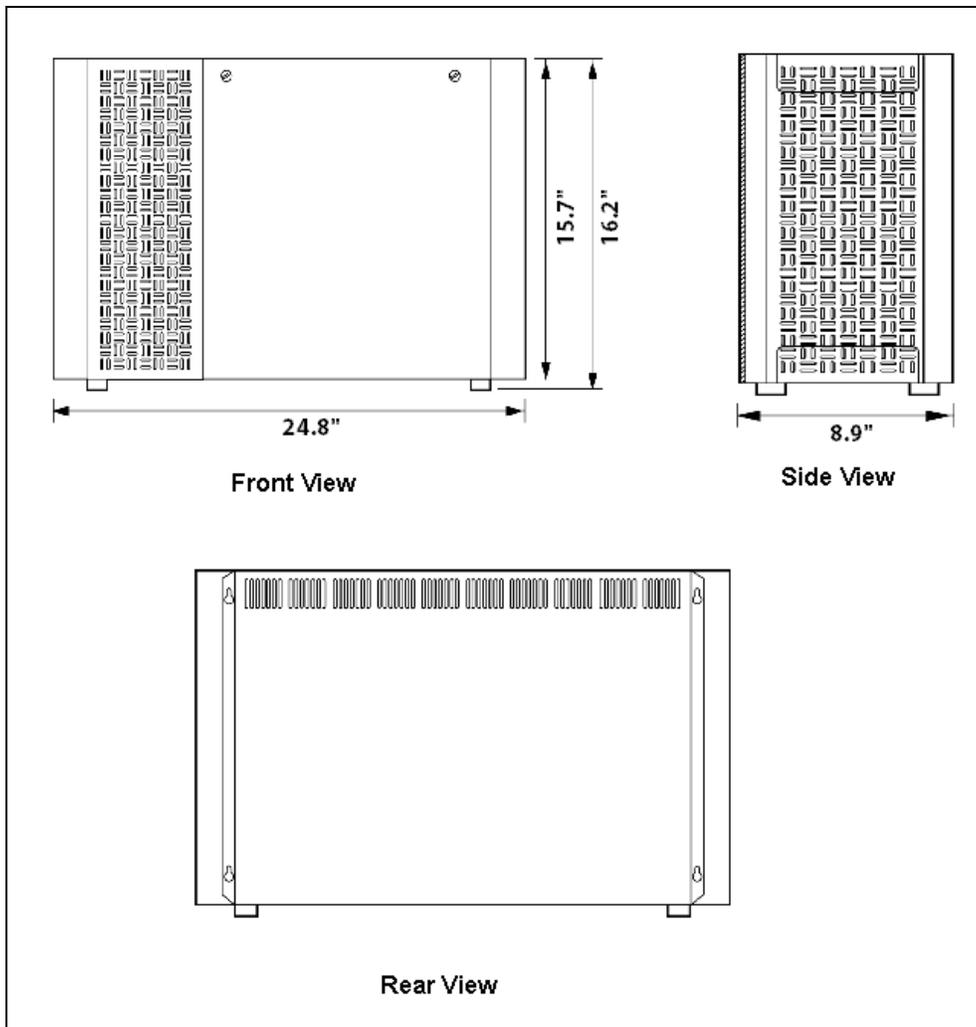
XTS Mounting Holes and Installation Layout
